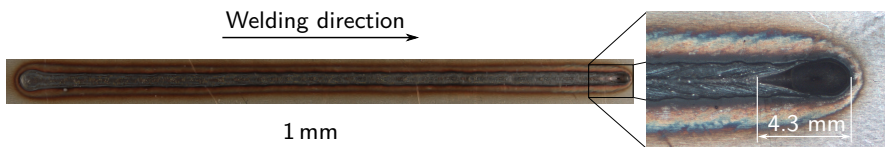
(left) Weld seam on the top surface of the 2 mm thick 316L steel sheets before extraction of macro sections; (right) an enlarged view of the weld end crater
